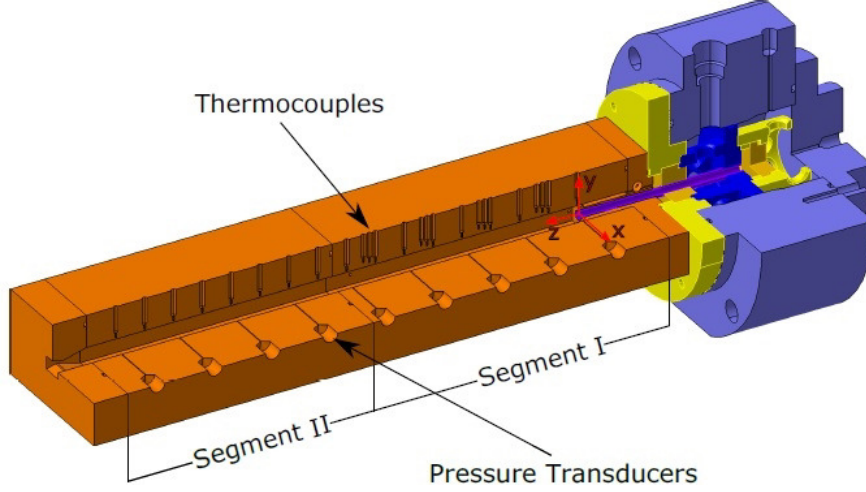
Axonometric view cad of the rectangular combustion chamber [16].
